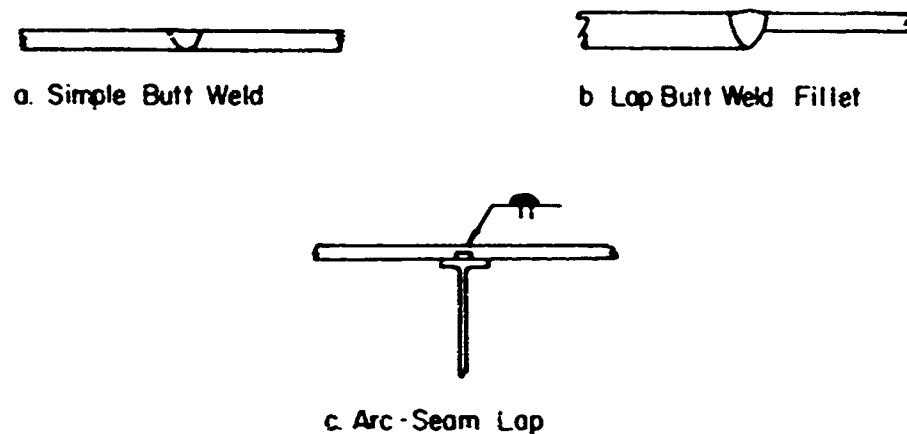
WING LEADING-EDGE JOINT DESIGNS (REF. 2)
